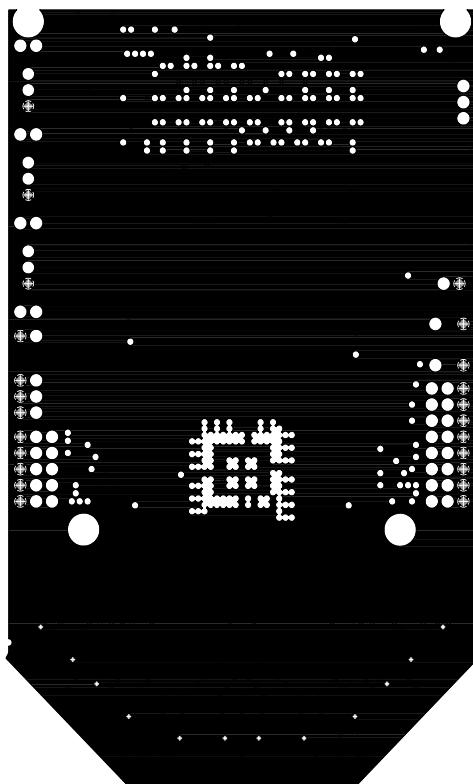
Si5100-EVB Layer 2—GND1 Plane (Daughter Card)
